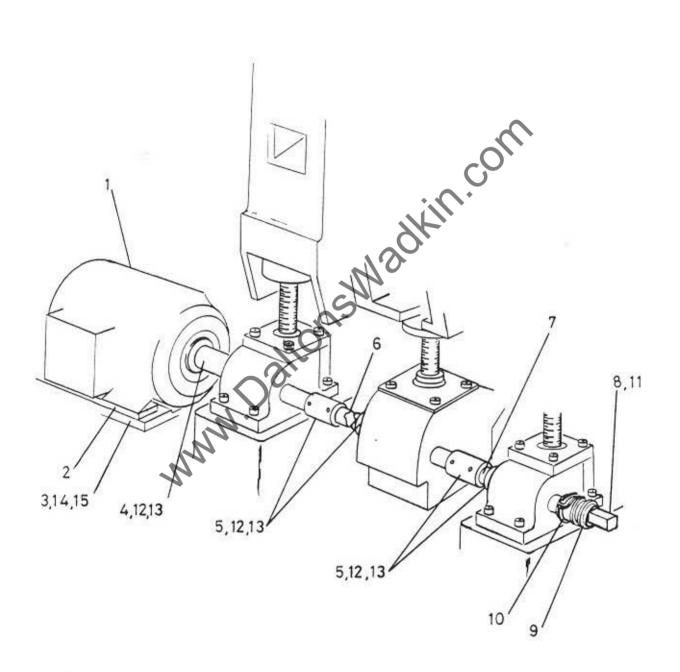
DRIVE SHAFTS TO RISE AND FALL FOR BEAM AND TOP HEAD
